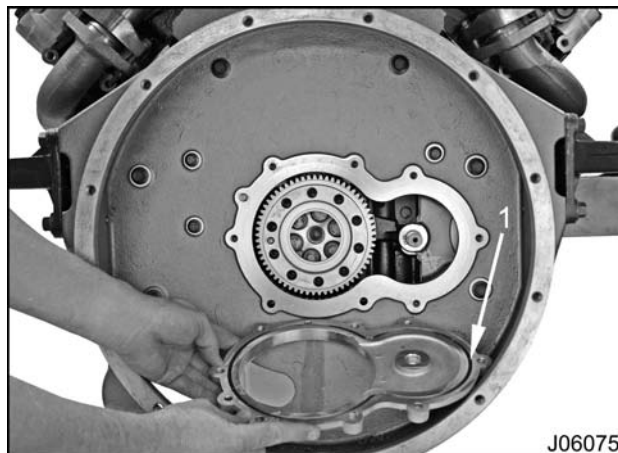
Removing the rear oil seal carrier (stripped chassis)
